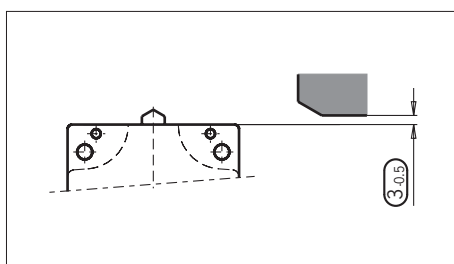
Mounting SN...-508 and SN...-514 for safety circuits
